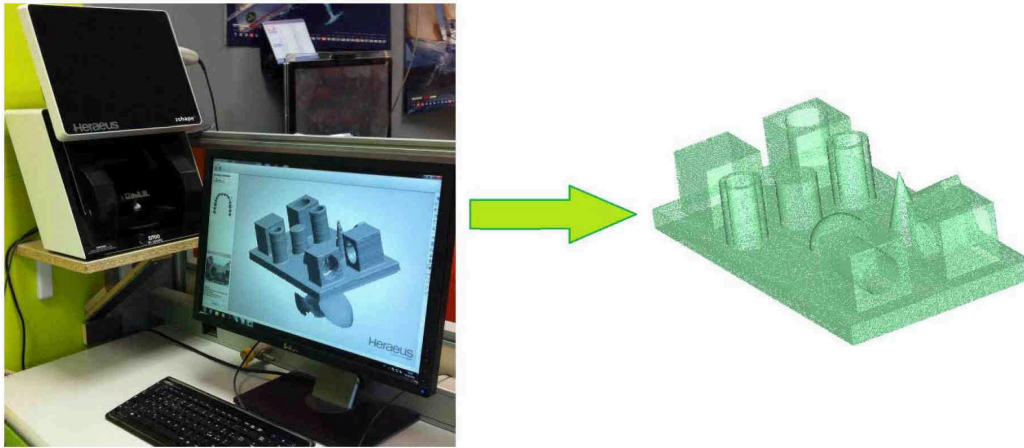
Benchmarking part RE acquisition by D700 Laser Scanner
